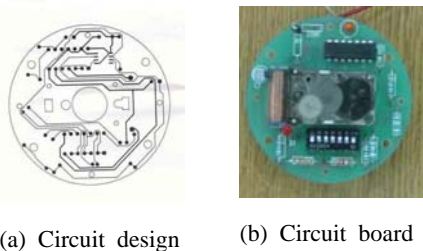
Manufactured PCB samples for adjustable lubrication time
